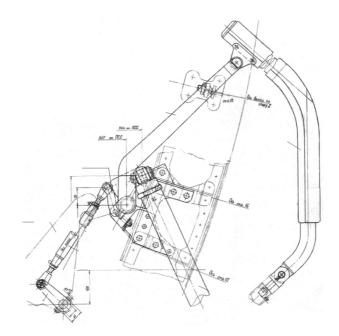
View against a flight. The position of the strut Z1, handrail Z2 and lever Z3 with the entrance door open.
